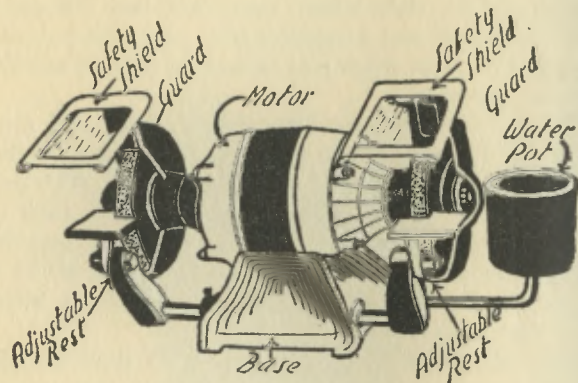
THE DRIVER HEAVY DUTY DIRECT DRIVEN BENCH GRINDER
